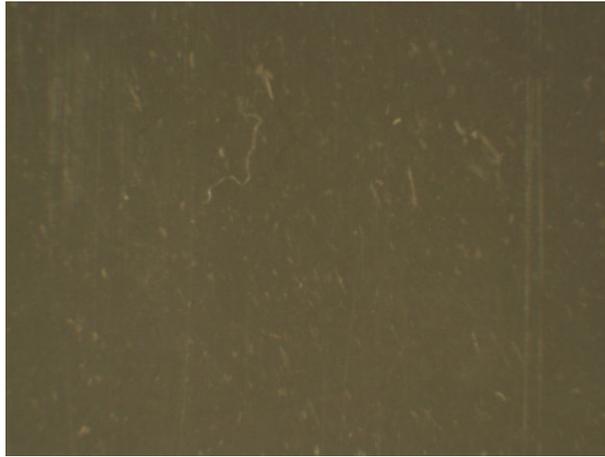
Inner wall surface; small damages and craze (shown surface: ca. 10x10 mm).
